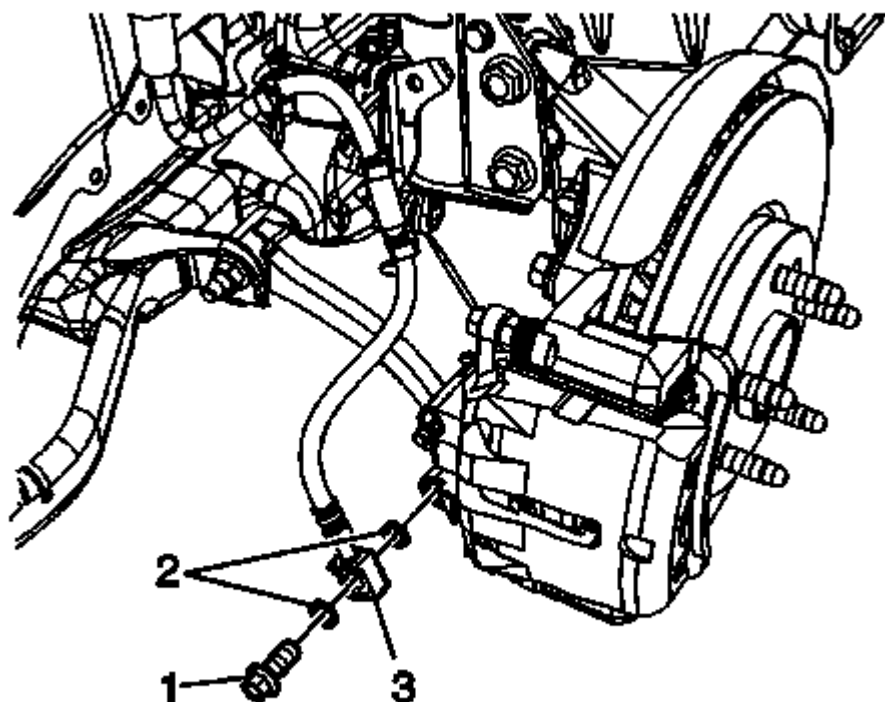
Brake Hose, Fitting Bolt & Fitting Gaskets
